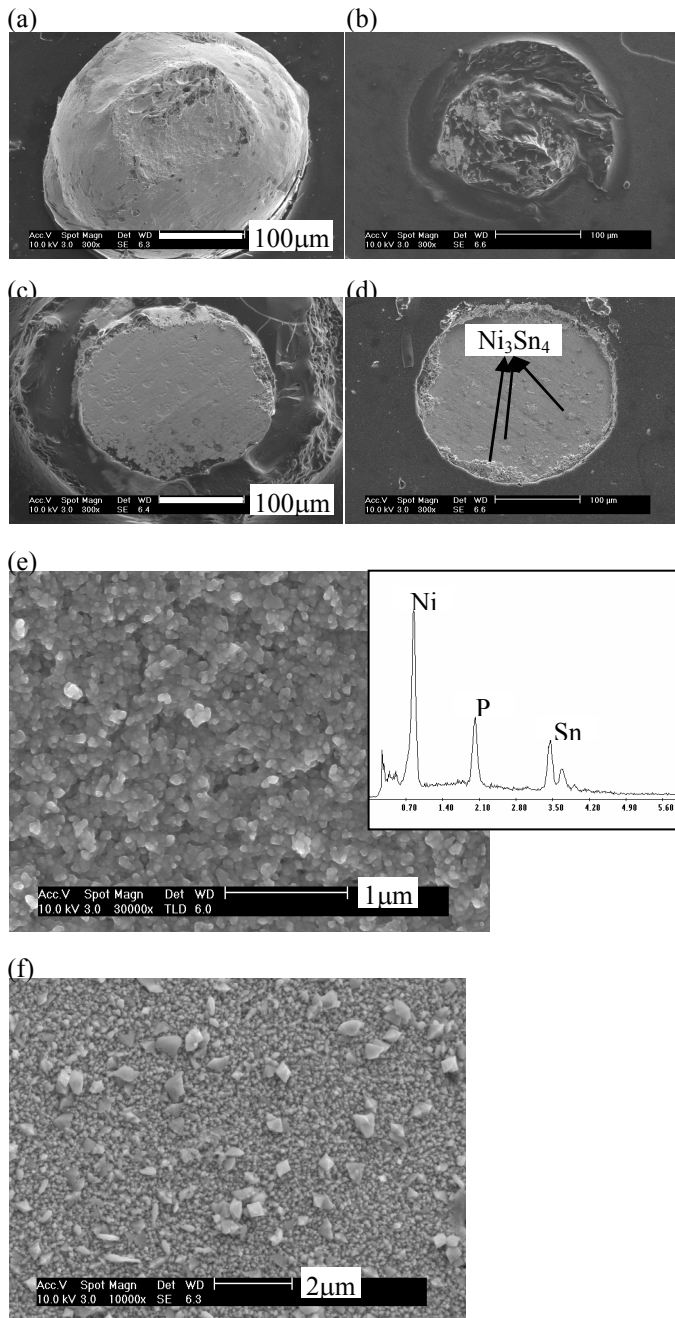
Plane-view SEM micrographs showing (a) ball side and (b) pad side of typical ductile-fractured solder joint, (c) ball side and (d) pad side of typical brittle fractured solder joint, (e) magnified view of the brittle-fractured surface of (d) and composition analysis by EDX area scan at 10Kv, and (f) the Ni-Sn-P layer formed on the Ni(13P) film after Ni₃Sn₄ spalling (the solder was selectively etched away).
